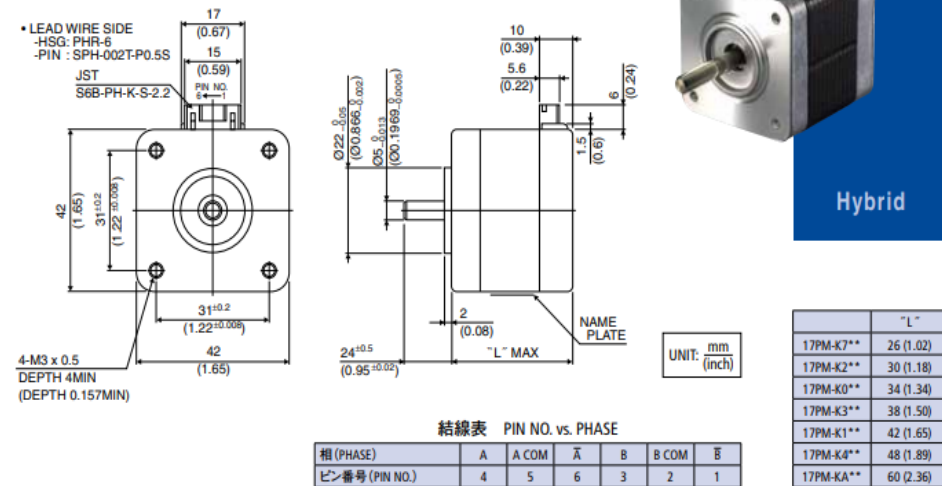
Stepper motor dimension (Eminebea, n.d.)
